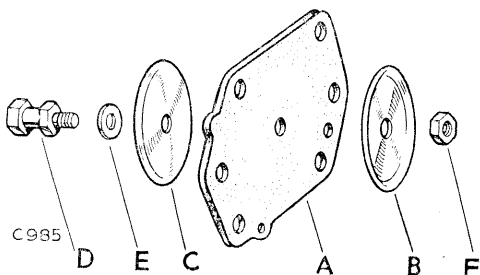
Layout of accelerator pump membrane assembly, 2 1/2 litre Petrol
